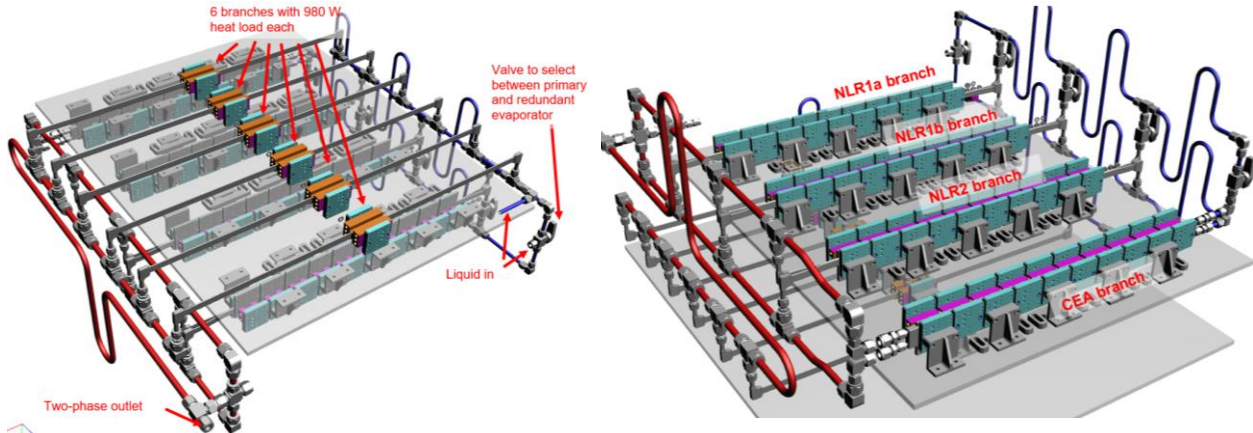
CAD drawings of the evaporator section with 10 branches (left: top view, right: bottom view)
